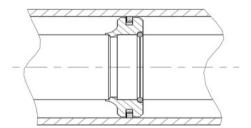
shows piston and piston ring in the mounted state, joined to the rack.
